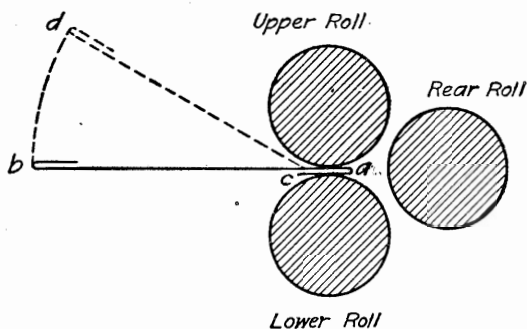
Inserting the Sheet Between the Rolls of a Forming Machine, to Form a Cylinder.
